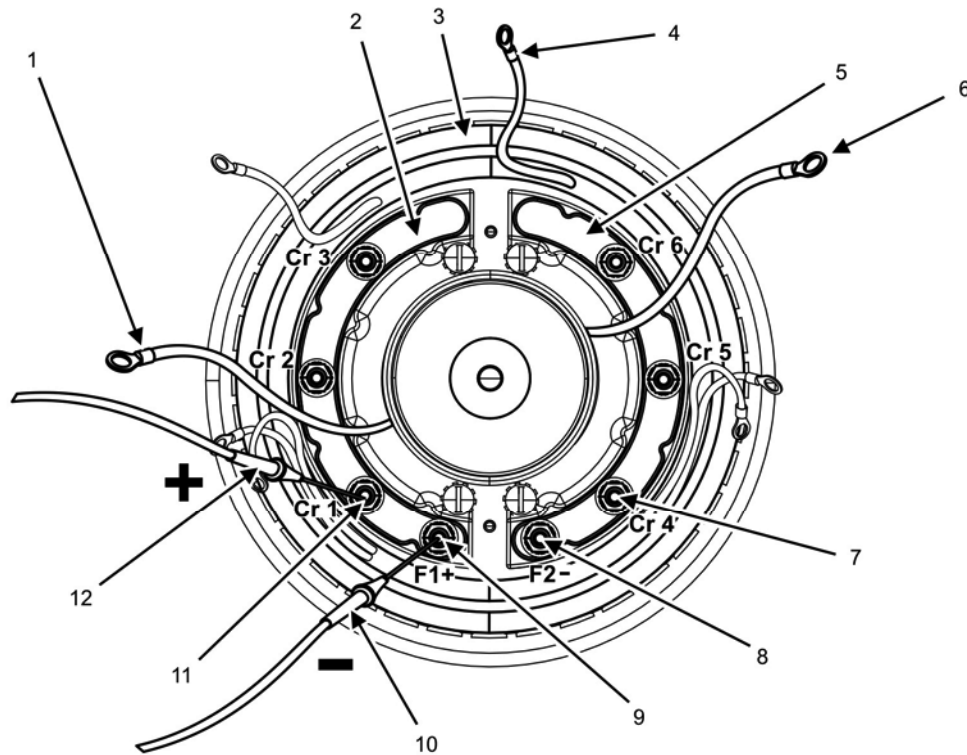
50/60 Hz Test Rectifier, Exciter and Generator Rotor.
